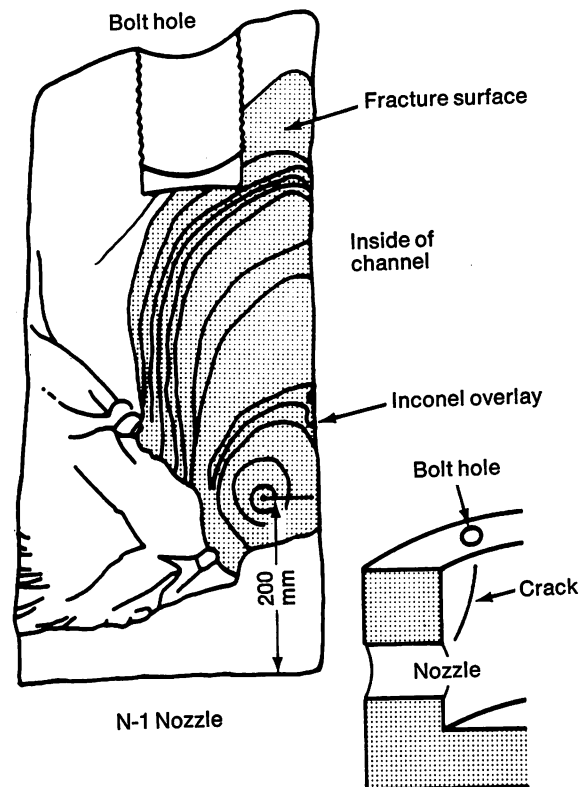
Sketch showing location of major cracks in the channel forging of Synloop waste heat boiler.
